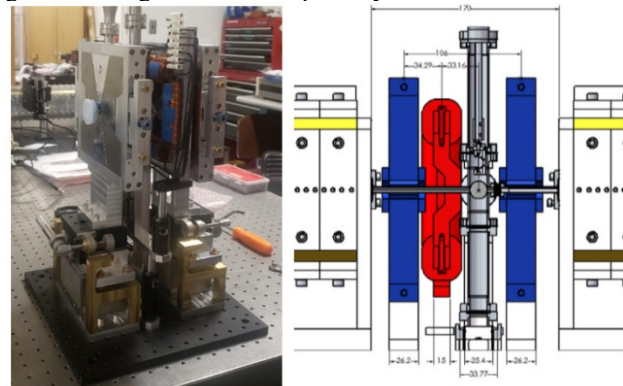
(left) Assembled break section. (right) Model of break section in-situ between undulators shown with size and spacing in mm.
